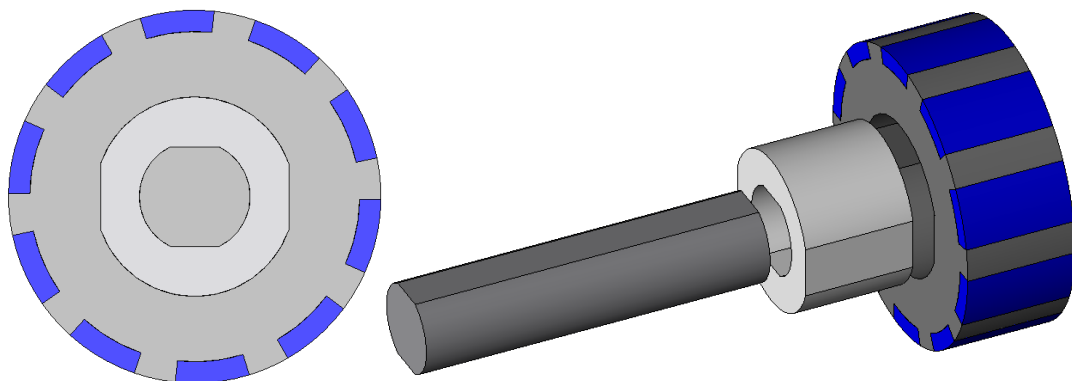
shows the stators, the conventional rotor with a magnetic shaft (left), and the composite rotor with a non-magnetic shaft (right) of the prototypes. In the composite rotor, the rotor lamination, non-magnetic ring, and shaft are nested together and aligned concentrically, as shown in Fig. 3.28 (c). Table 2.6 shows the key parameters of the prototypes.
